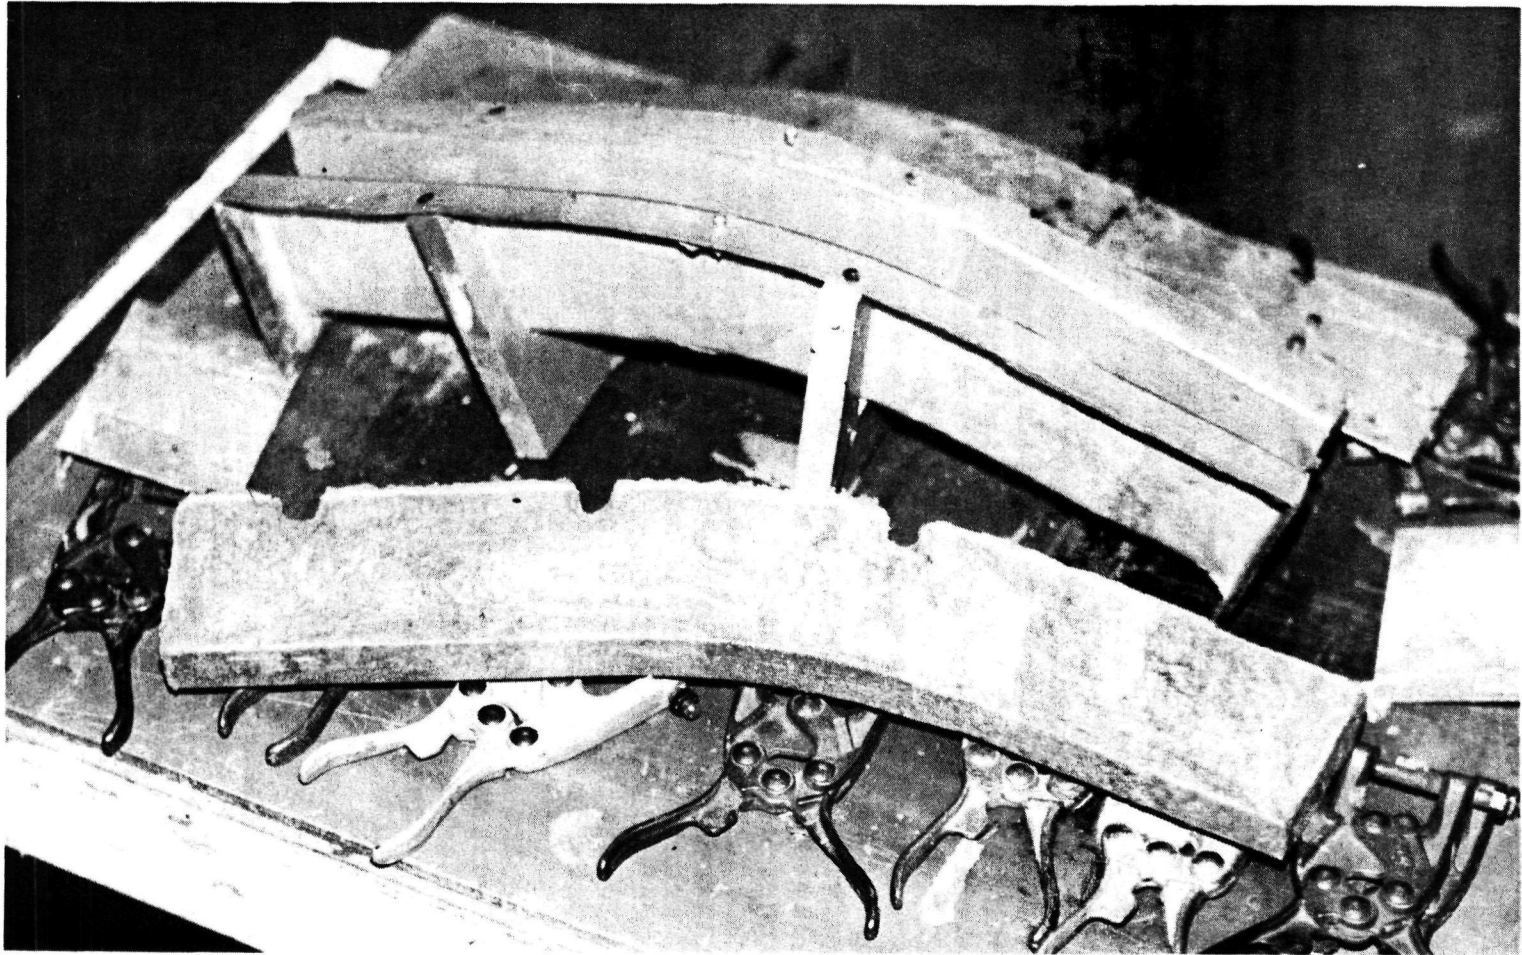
EWR 32381 FOAMING TOOL SHOWING UNTRIMMED FOAM FRAME CORE HALF SECTION.
